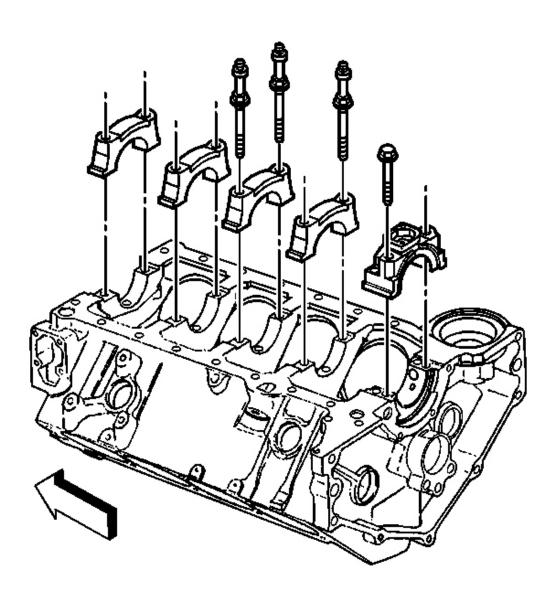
View Of Crankshaft Bearings At Engine Block Courtesy of GENERAL MOTORS CORP.
